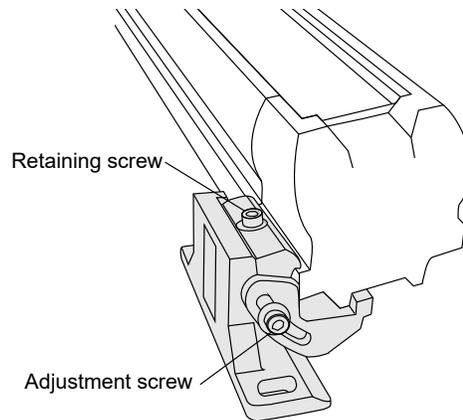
Fitting Adjustable Side Bracket to Shadow 9 Head
